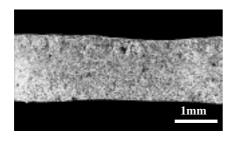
Longitudinal cross section of lap joint of GA steel sheet welded by hybirid welding
